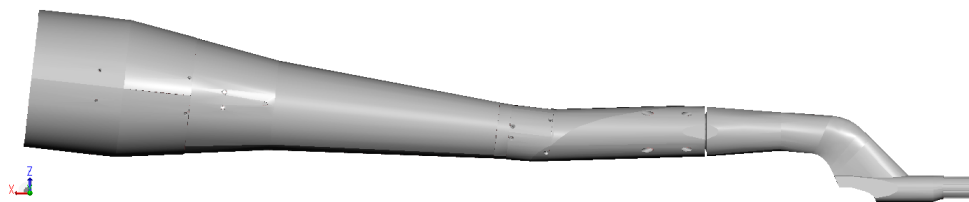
Illustration of the CAD model of the ETW blade sting assembly; seals, screws and bolts are not shown here (model courtesy of M. Wright, ETW)
